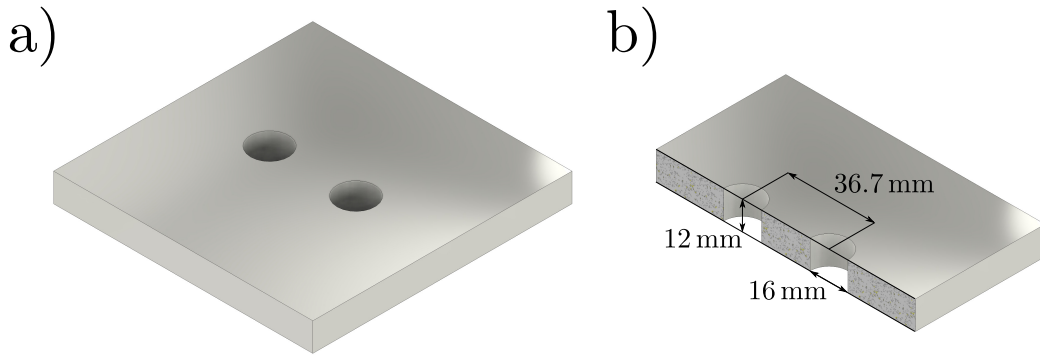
CAD drawing a) with cross-sectional view b) of the double-hole Al target to show the dimensions of the pilot-holes.
